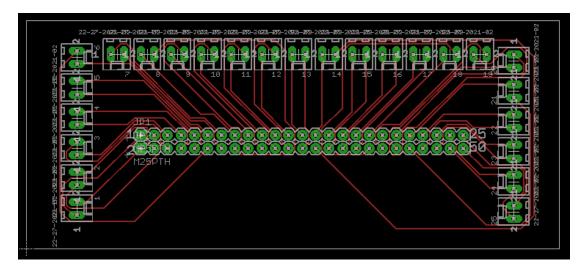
Board Layout of the 50 pin Breakout Board for the Sensoray 826 I/O card
